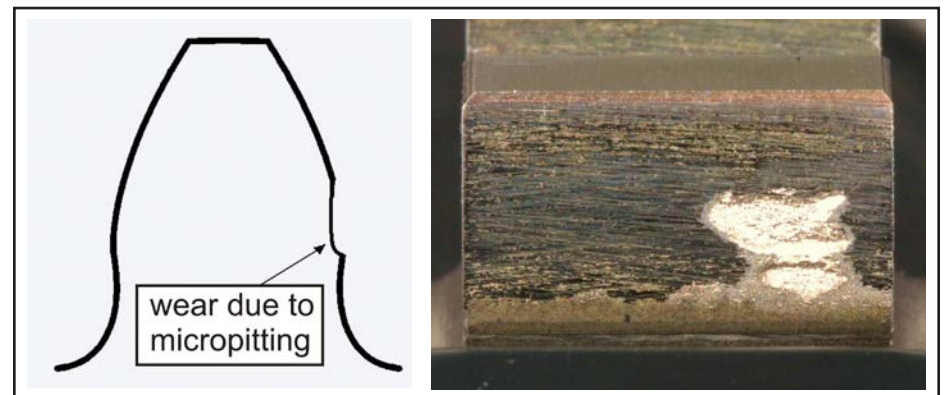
Micropitting (left) deviations on gear flank; pitting (right) caused by micropitting.
